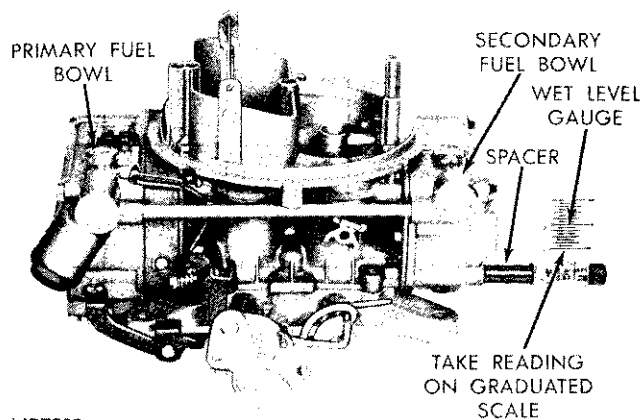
Checking Wet Fuel Level (on Vehicle)
